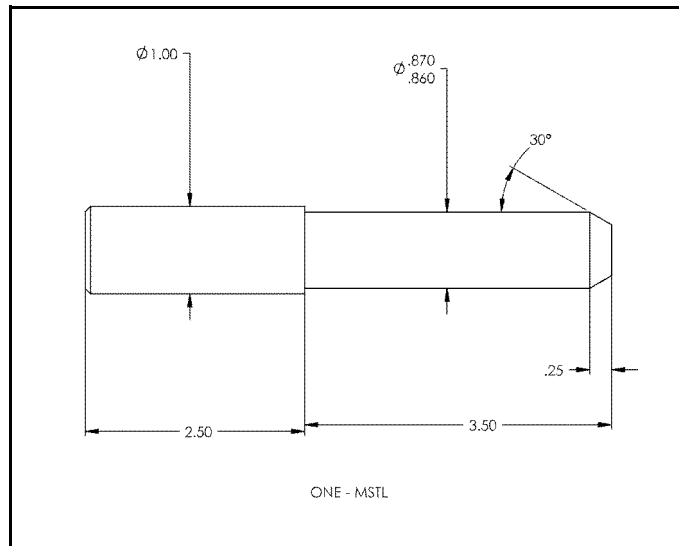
Drift Pin for Lining Up Thrust Washers with Output Planet Gear
